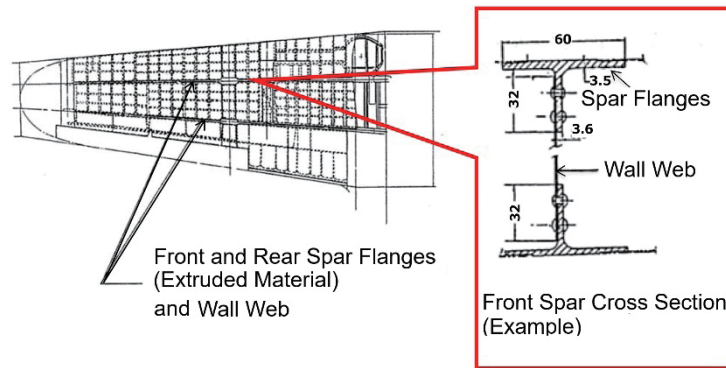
Zero Wing and Cross-Sectional View of Front Spar^{16, 17}
